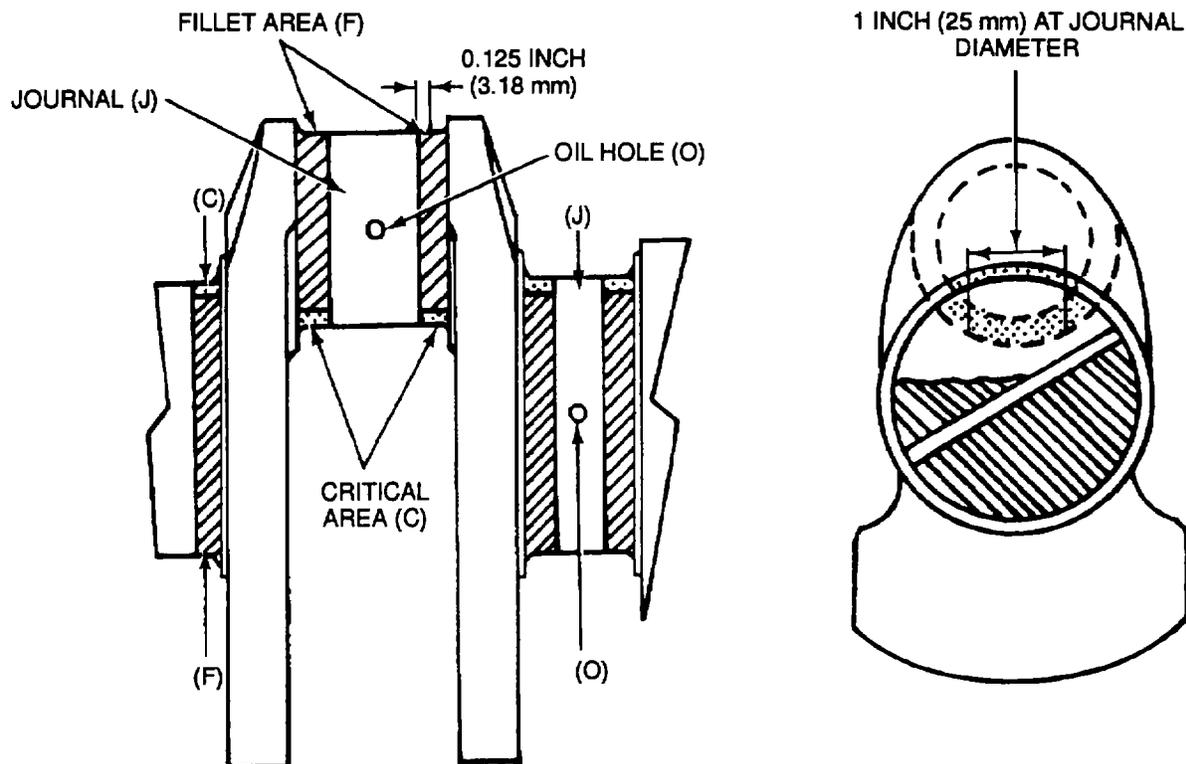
Magnetic Inspection of Crankshaft
